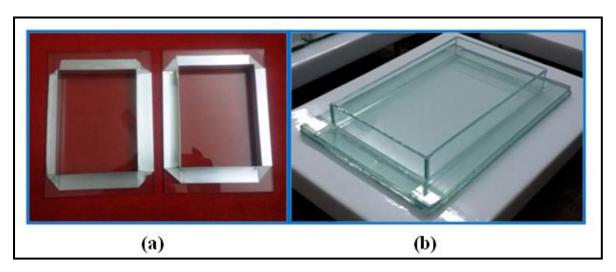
(a) Small glassy mold, (b) Large glassy mold.
